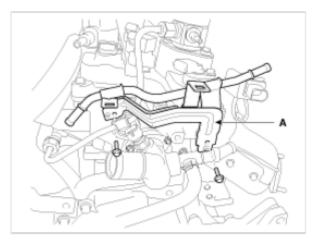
Identifying Vacuum Pipe Assembly Courtesy of HYUNDAI MOTOR AMERICA
